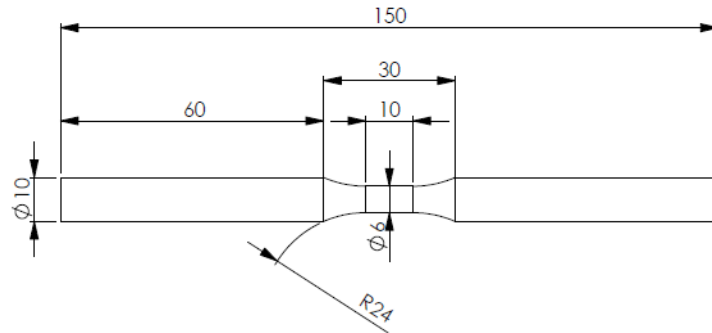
Geometry of hourglass cyclic test specimen. All dimensions are in 'mm'.
